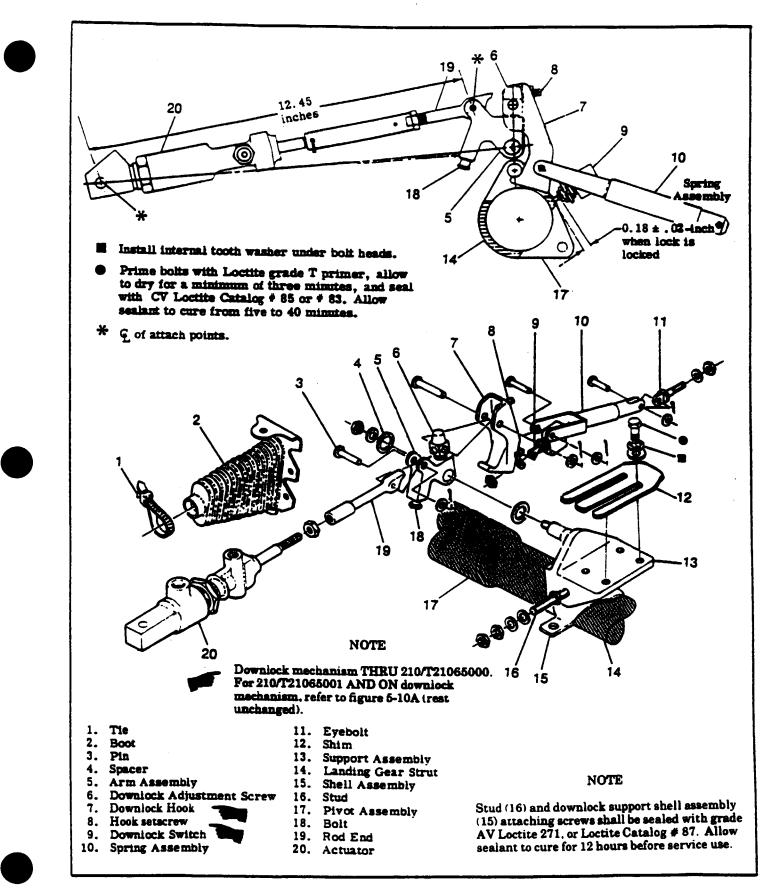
Rigging Main Landing Gear (Sheet 1 of 3)
